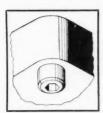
Drawing showing application of standard socket head cap screw as support for jig or fix-
